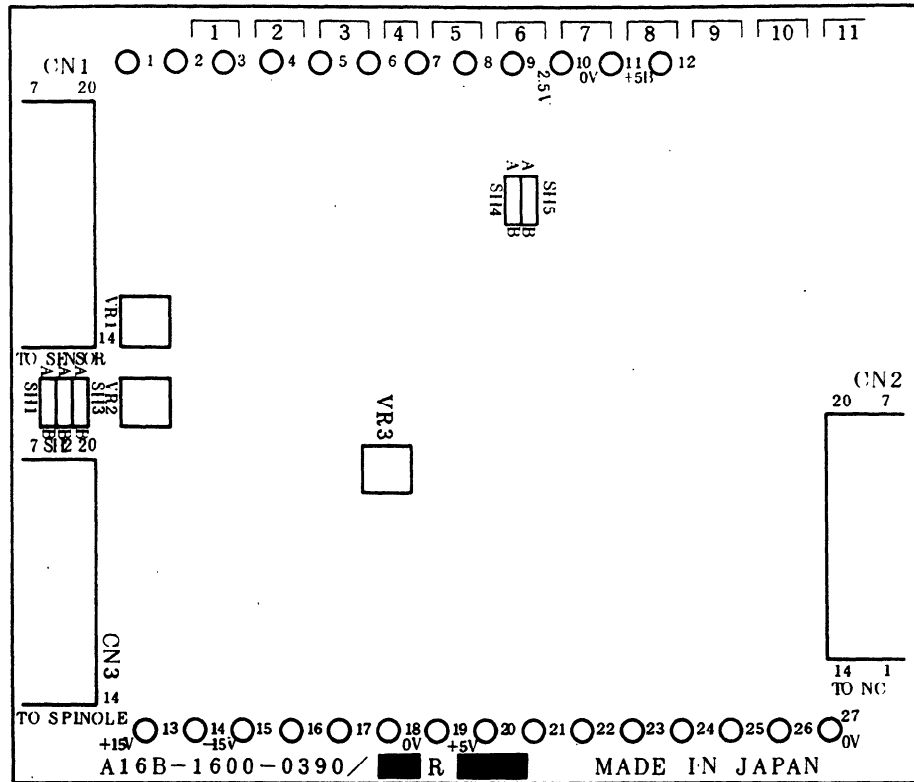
(c) Mounting positions for jumper, variable resistors and test points
